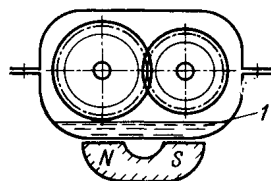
Magnetic-powder lubrication of toothed gearing
